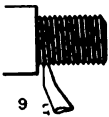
Threads may also be cut on a lathe, note the lathe tool cutting an outside or male thread.
